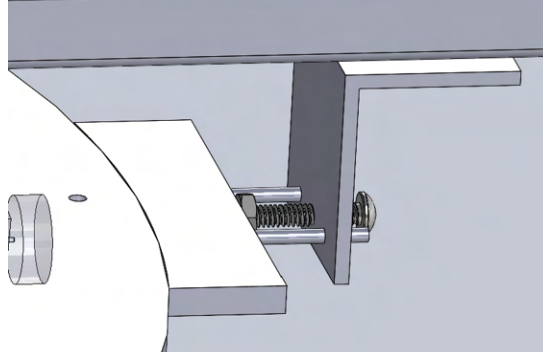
This figure shows the final design CAD assembly focusing on the angle bracket attached to the slider arm and the brake attached to the angle bracket by dowel pins as well as the bolt/nut mechanism which allows for the adjustment of resistance.
